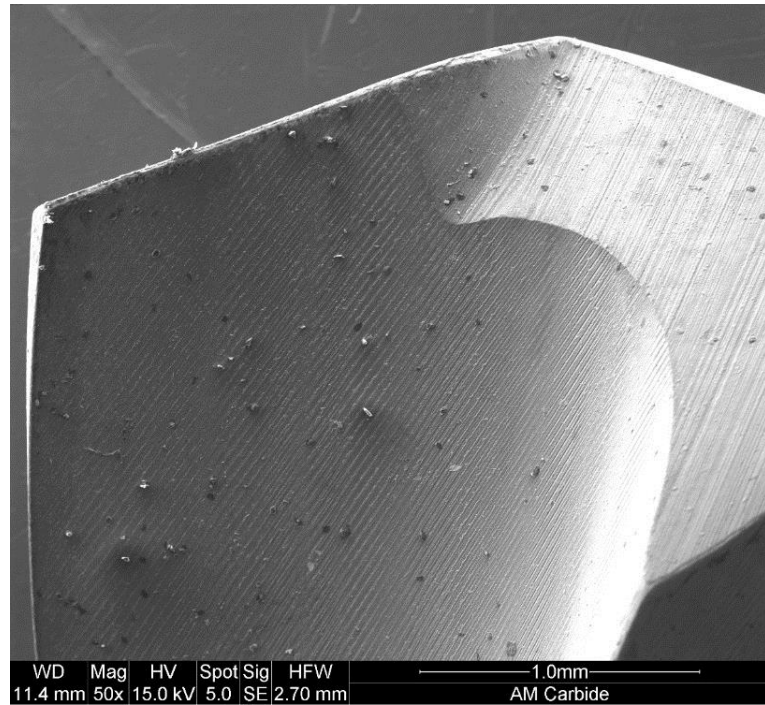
50x SEM flute view of the carbide drill bit cutting edge after drilling 60 holes in AM titanium.
